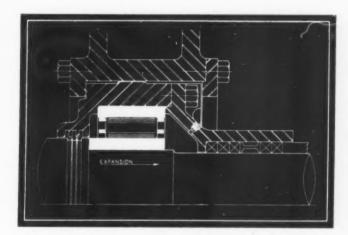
High-load type solid roller bearing as applied to the tending end of paper machine dryer roll
